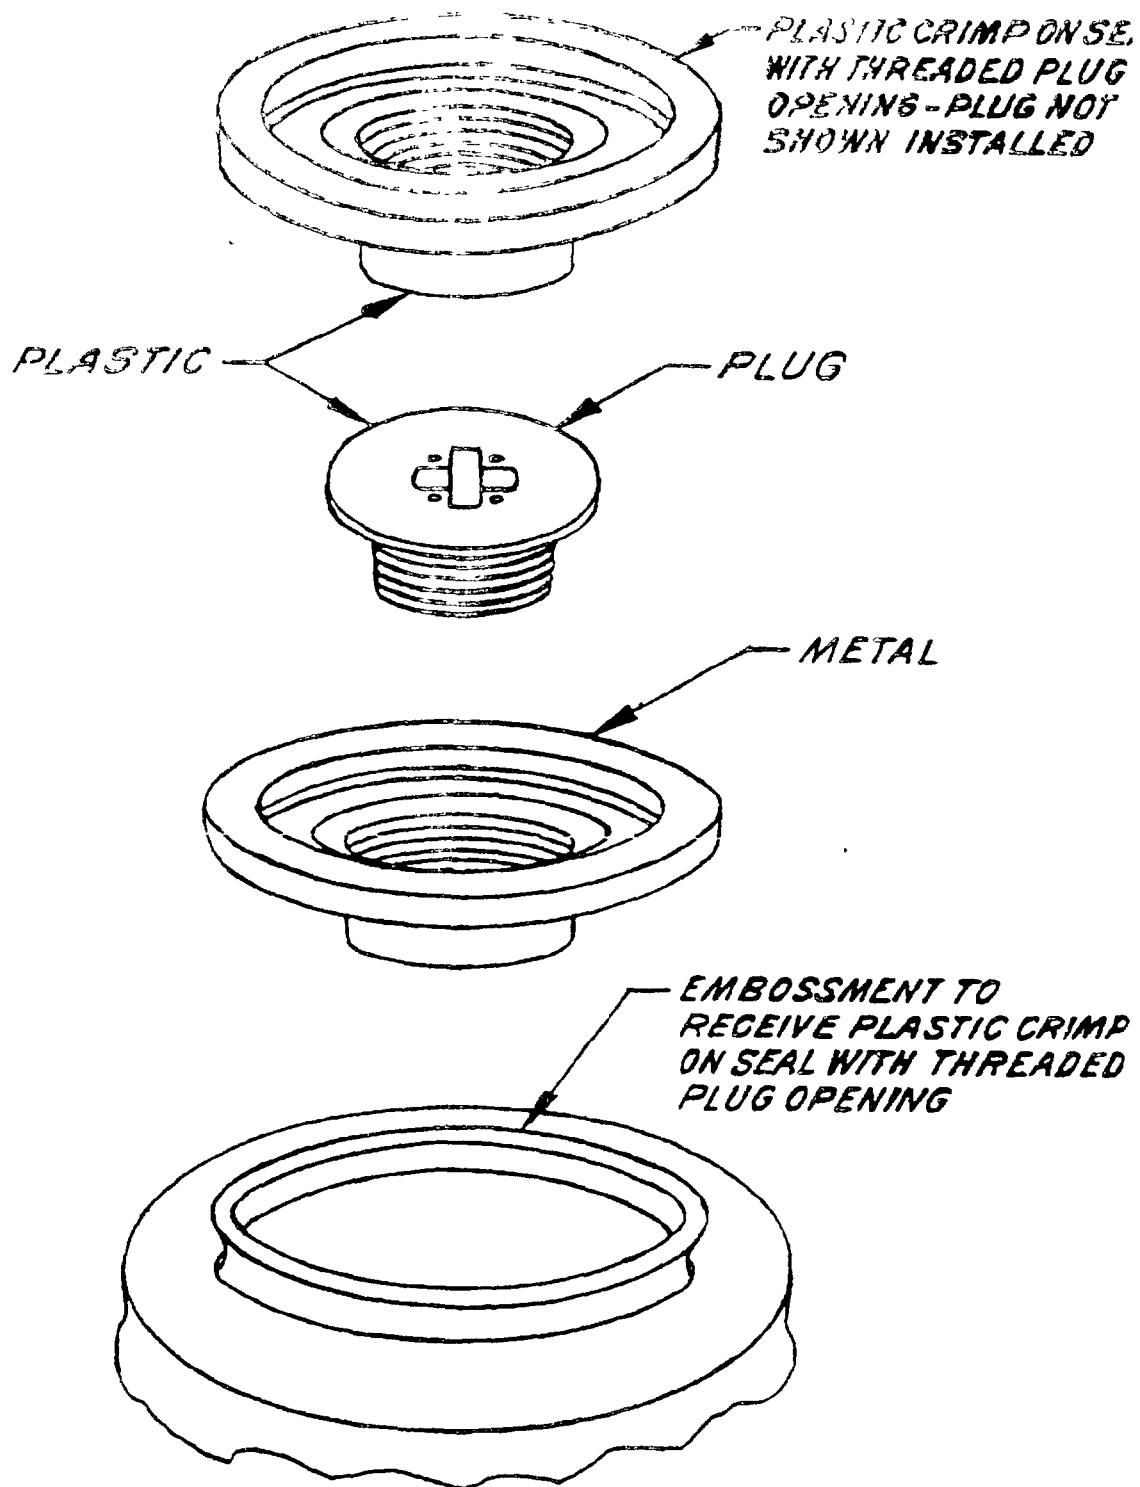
, PLASTIC CRIMP ON SEAL WITH THREADED PLUG OPENING
